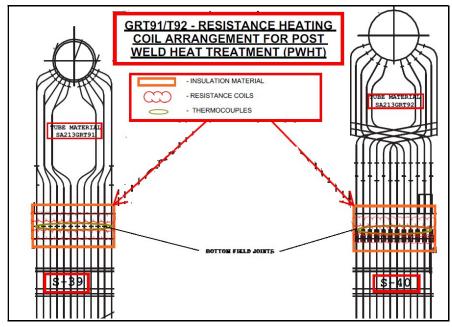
Resistance heating Coil arrangement for PWHT of T91/T92 tube assembly
